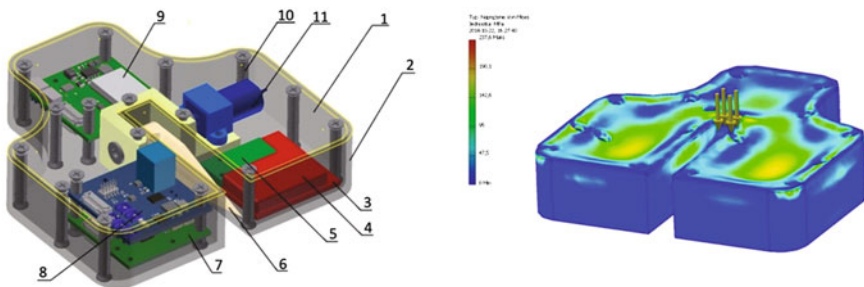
Spade-shaped R-TPD design and FEM analysis. 1 Cover, 2 main body, 3 inductor, 4 battery, 5 IMU, 6 spike, 7 battery balancer PCB, 8 motor control PCB, 9 radio PCB, 10 support post, 11 DC motor
